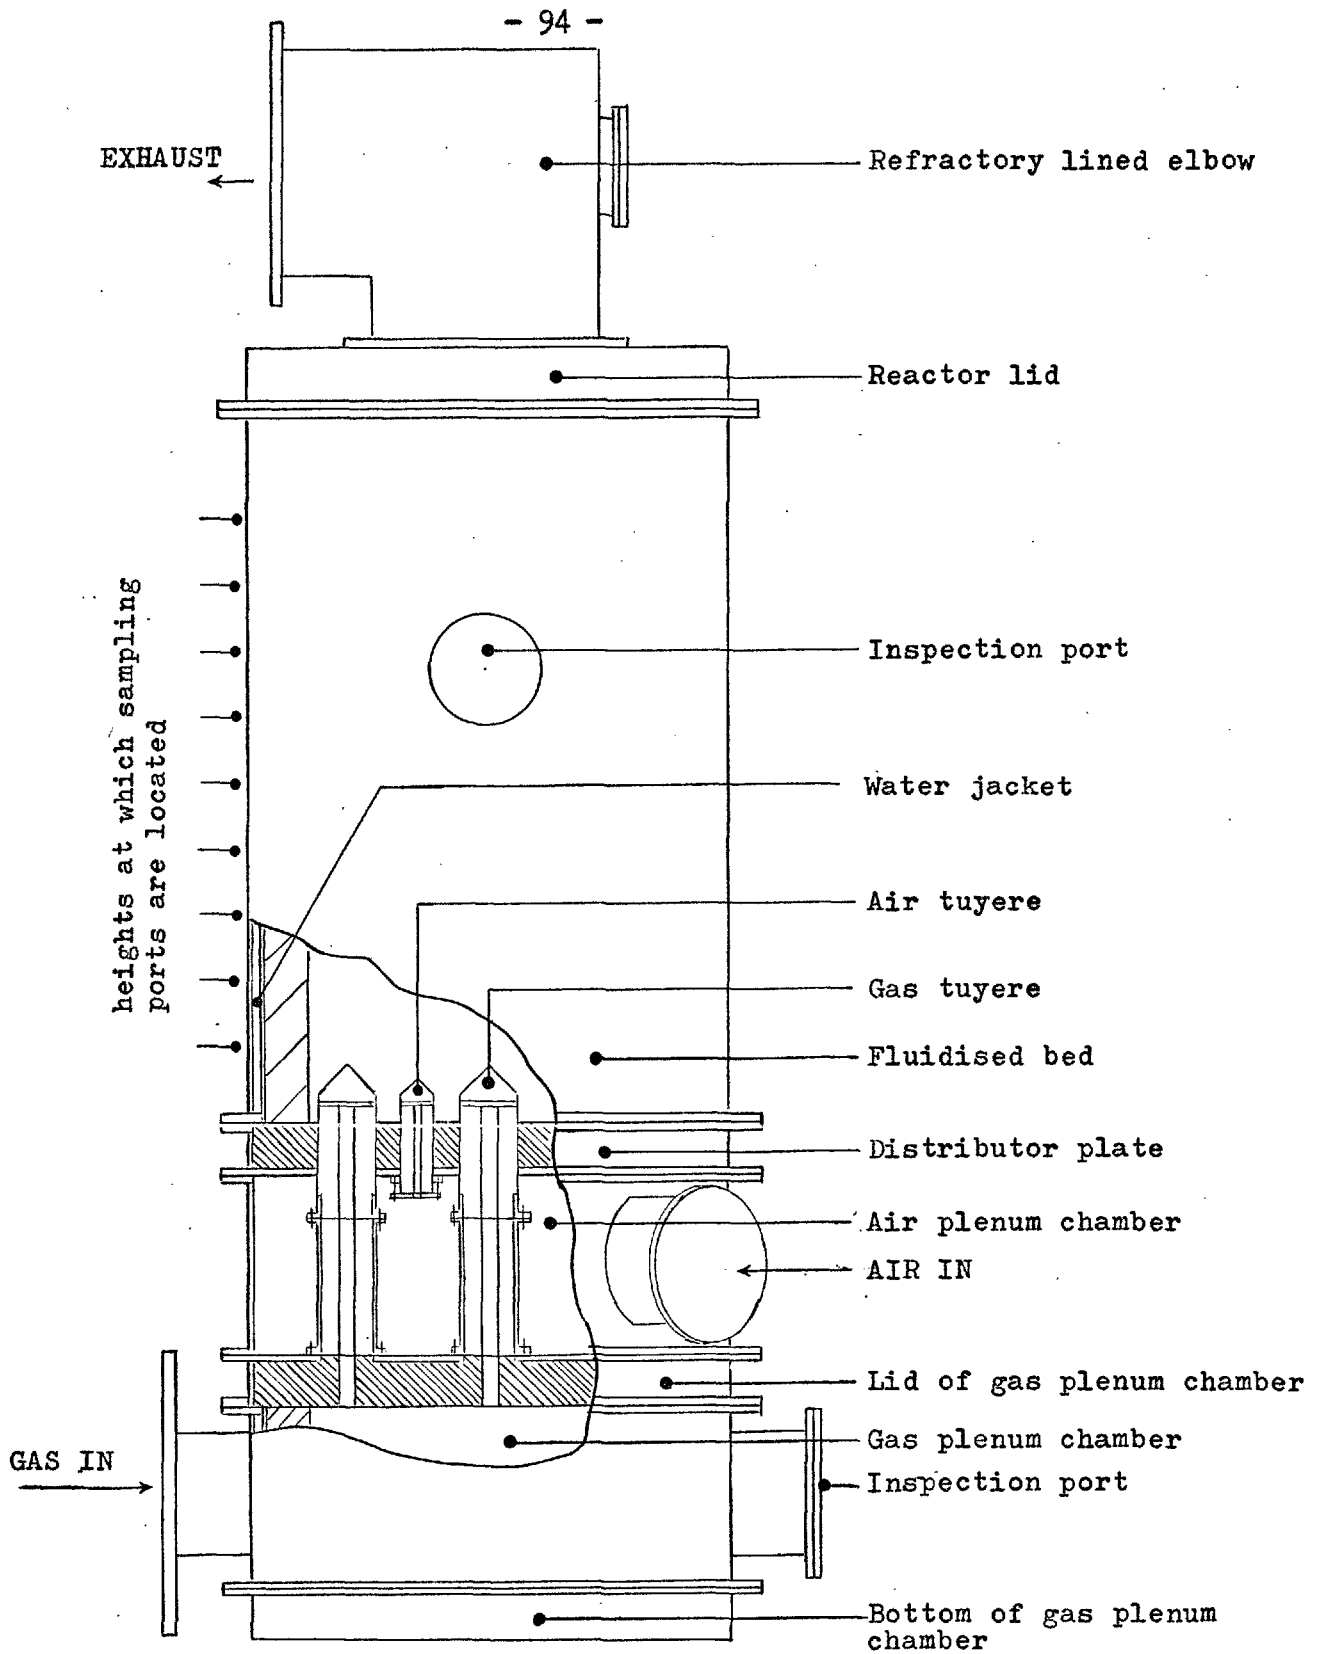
ASSEMBLY OF FLUIDISED BED COMBUSTOR.
